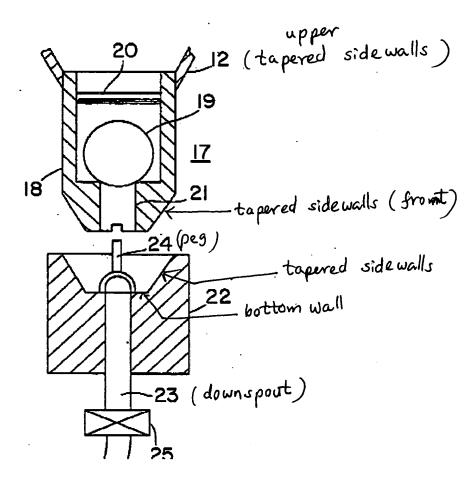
Exhibit A shows a bottom emptying device having a bottom wall and tapered side walls mounted about the periphery of the bottom wall wherein the bottom wall further having an aperture and a peg (24) mounted in upstanding relation to the bottom wall, and a downspout (23) depending from the bottom wall and being positioned substantially adjacent to the aperture. The downspout (23) has an inner bore or a lumen to allow the fluid flow from the downspout to the desired container.
